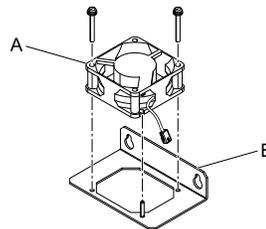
Slide the Circuit Board Cooling Fan Units
